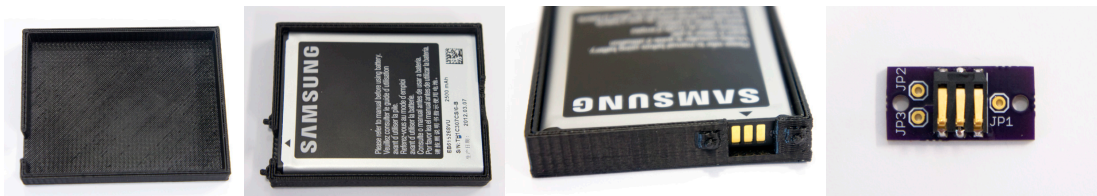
Development of battery housing. Multiple versions were produced, with the final version including a custom made board utilising spring contacts for connecting the battery.
